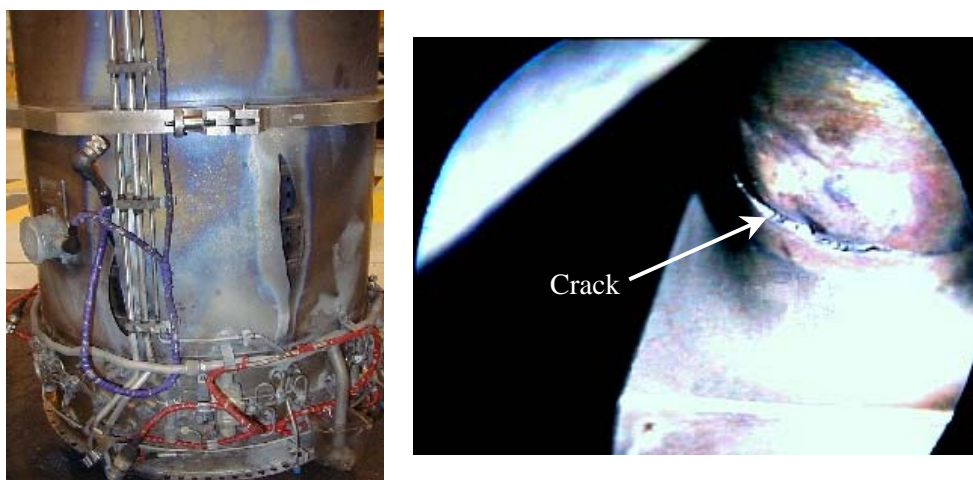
Damaged Engine and Cracked Lower Fuel Manifold
